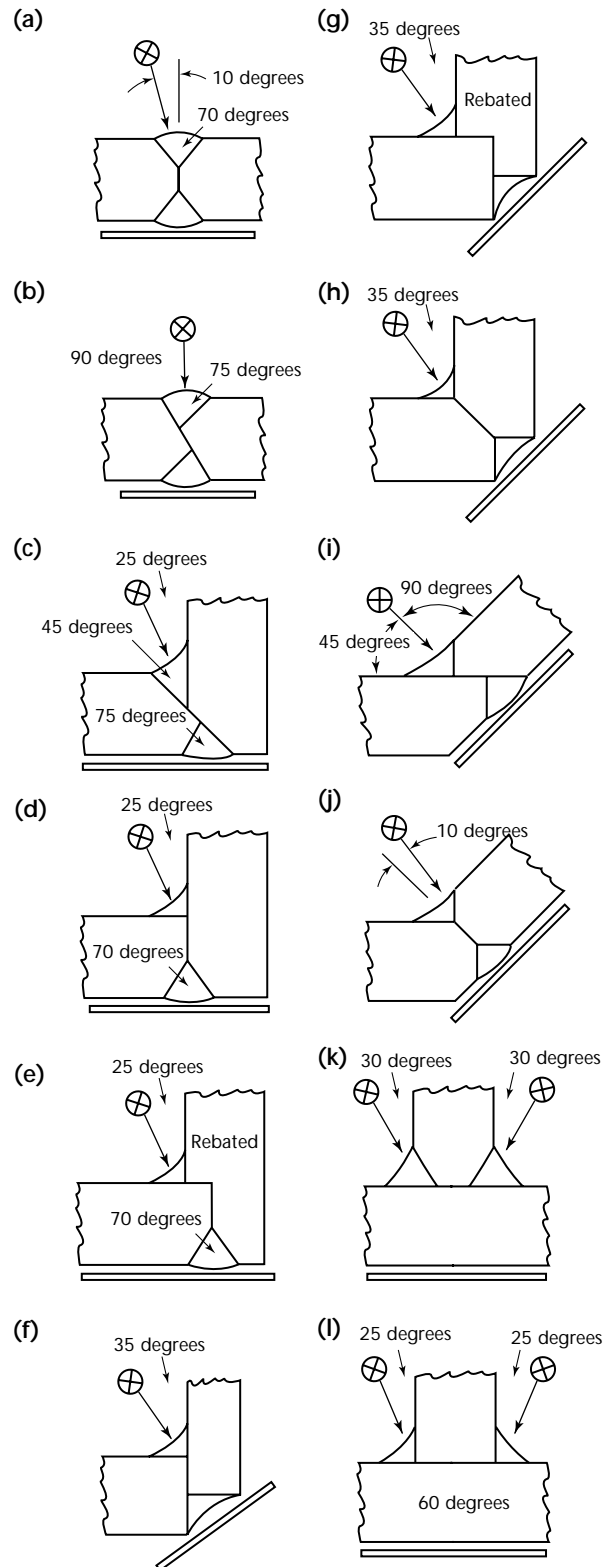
shows the recommended radiographic procedures for partial penetration weld joint designs. Partial penetration welds differ from full penetration welds and require more care when being radiographed to ensure complete or maximum weld coverage with minimum interference from the normal unfused weld joint land. Figures 16 and 17 illustrate radiation angles for two typical weld joint designs.
